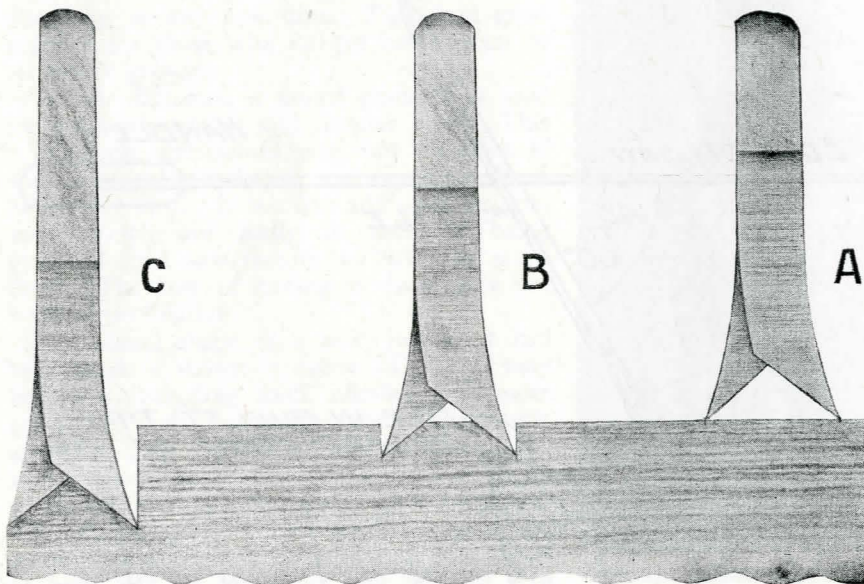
AN ENLARGED SECTIONAL VIEW SHOWING THE ACTION OF A CROSSCUT-SAW TOOTH
